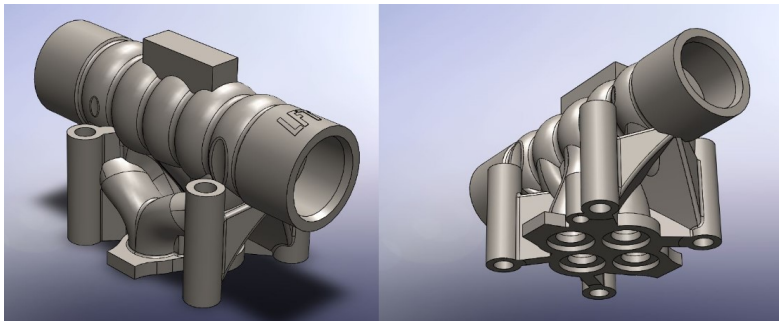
Finished CAD model of the valve housing (86 mm x 47 mm x 43 mm).
